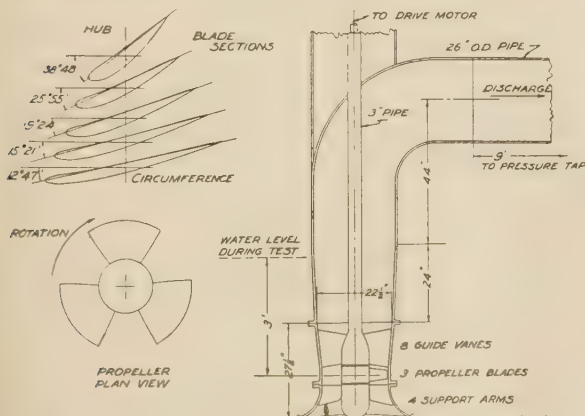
20-IN. PROPELLER PUMP OF THE PFLEIDERER TYPE
